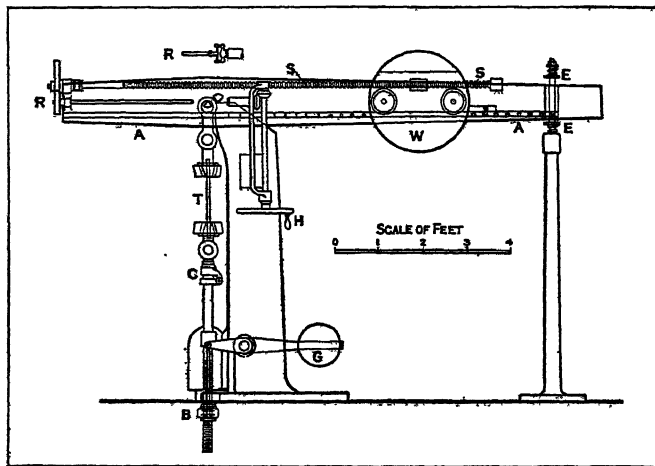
SINGLE-LEVER TESTING MACHINE
